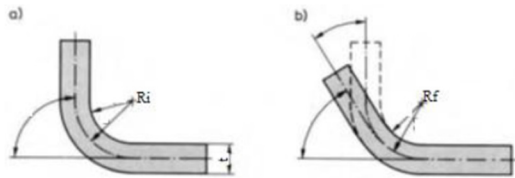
Springback on bending (a) Before springback, (b) After Springback.
